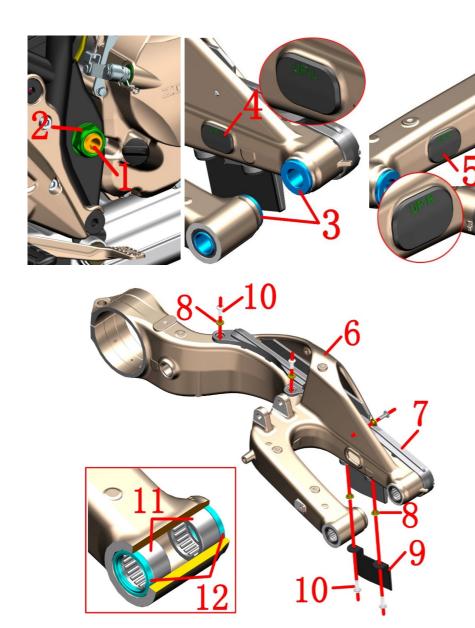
R	tear wheel,	Rear wheel assembly	CHK	40)
